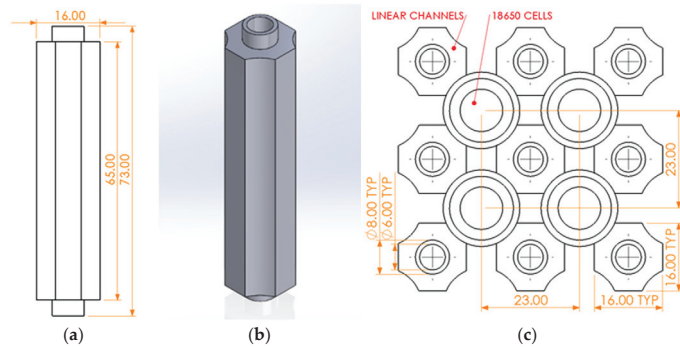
LCD views and dimensions, all in millimetres: (a) Single channel side view; (b) Single channel ISO view; (c) Battery pack top view with fluid domain removed.
